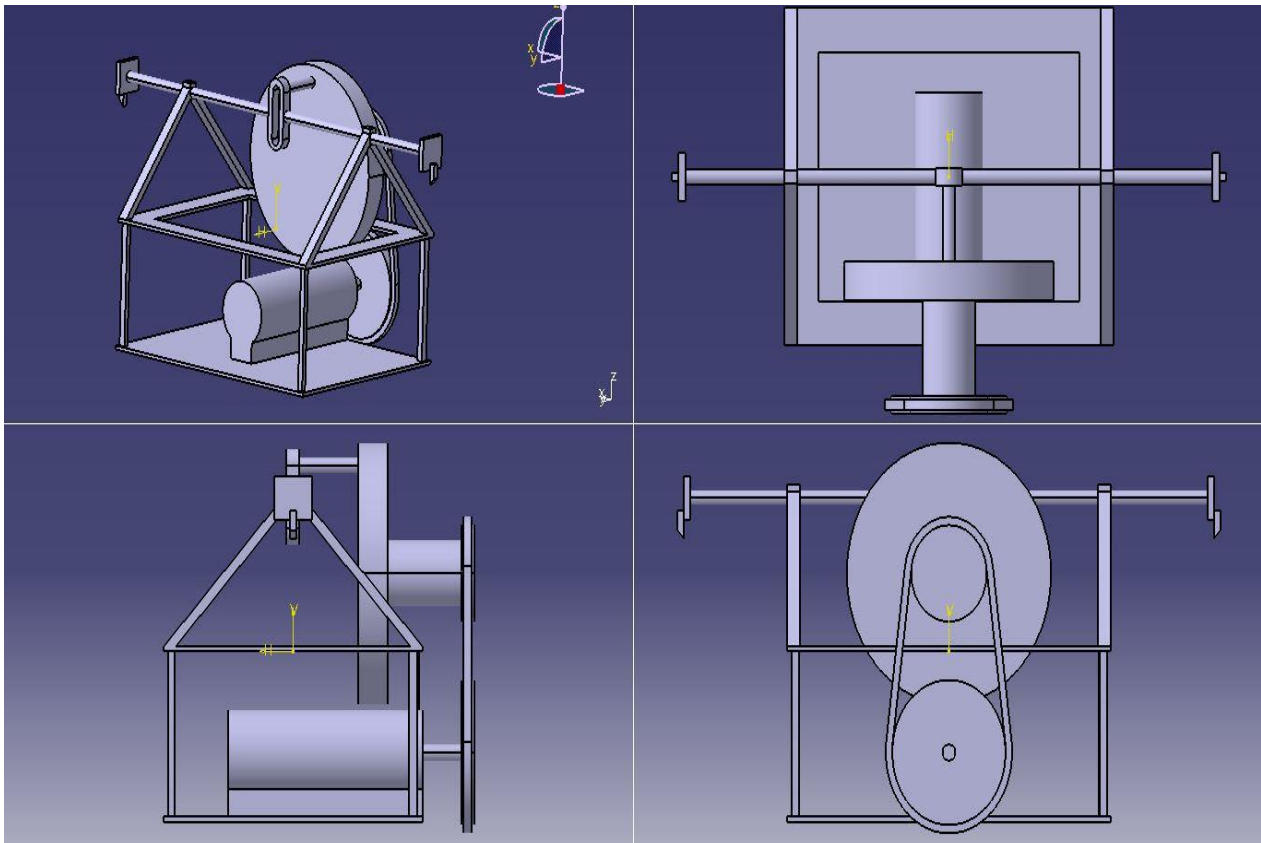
Design isometric view of scotch yoke mechanism dual sided shaper
